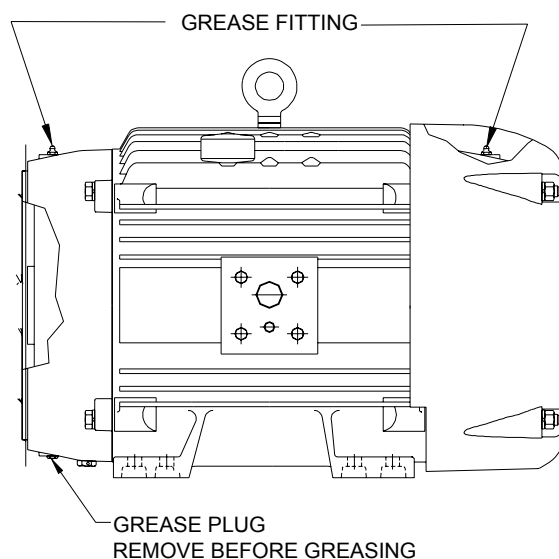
Typical Drive Motor Grease Fittings and Drain Plug
